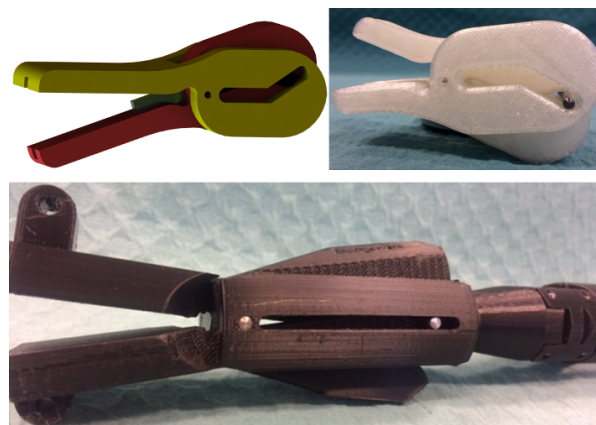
(Top left) CAD drawing of tip components. (Top right) 3D-printed concept for mechanical evaluation. (Bottom) Improved concept ready for experimental evaluation.
